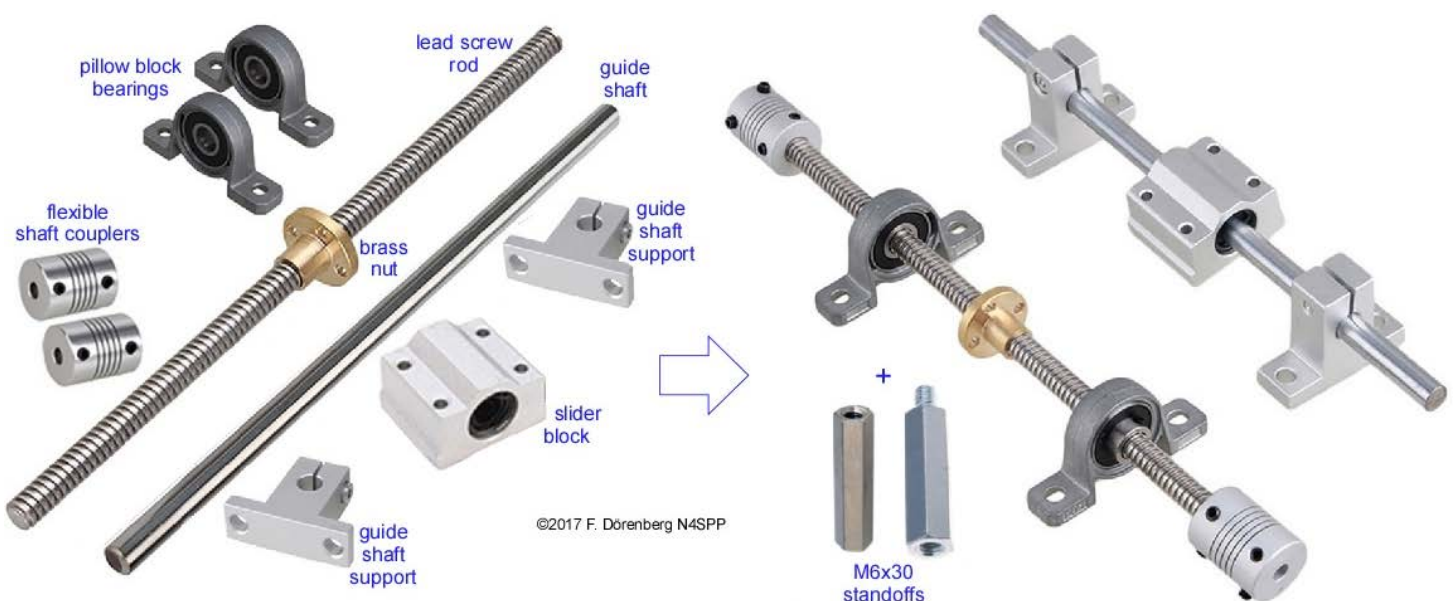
The assembly for converting shaft rotation to linear motion - for actuating the end-
